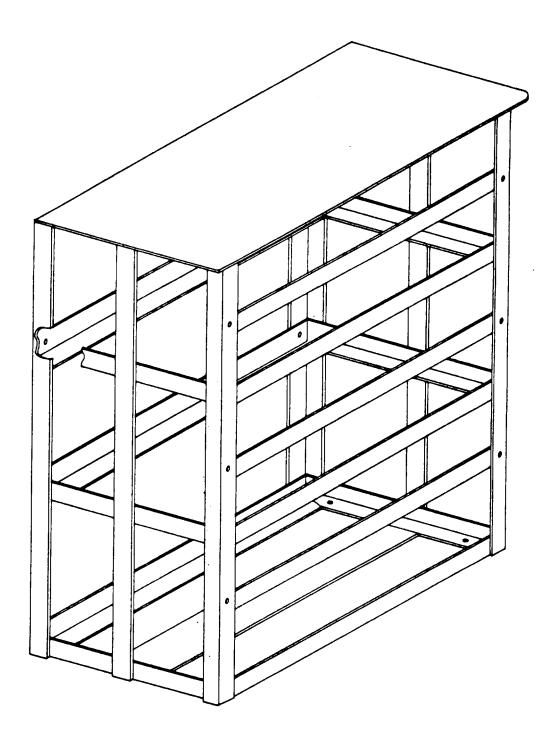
Tool Box Rack Assembly Part Number 20089720-1 (Sheet 1 of 11)
